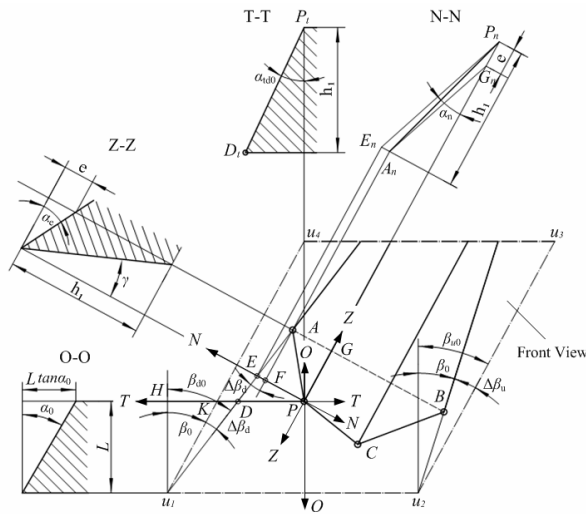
Front view of cutting angles for a modified helical gear rack.
